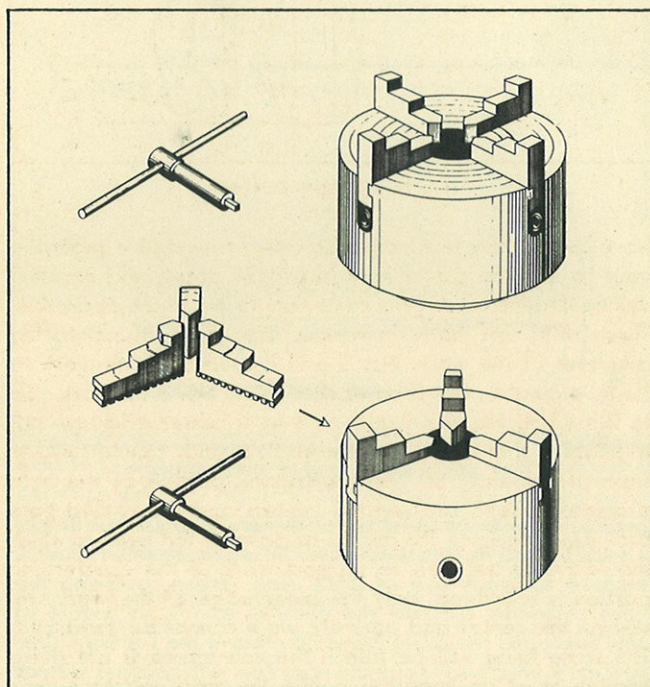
3 AND 4-JAW LATHE CHUCKS
